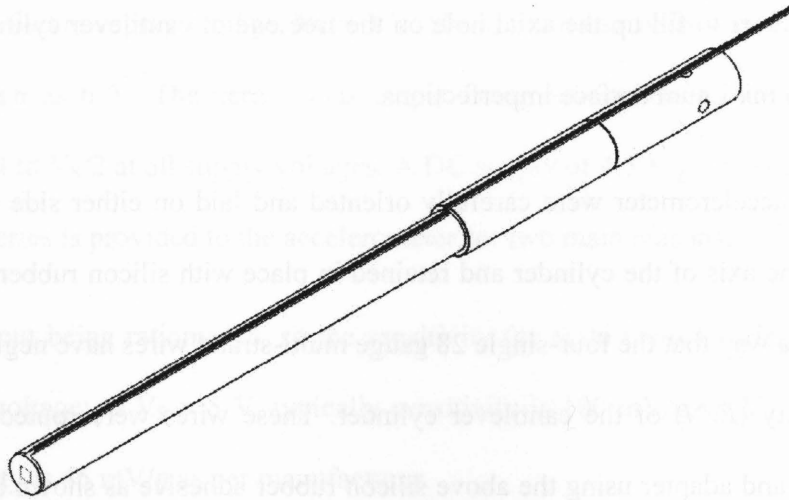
Isometric view showing the installation of the accelerometer with wires on the cantilever cylinder
